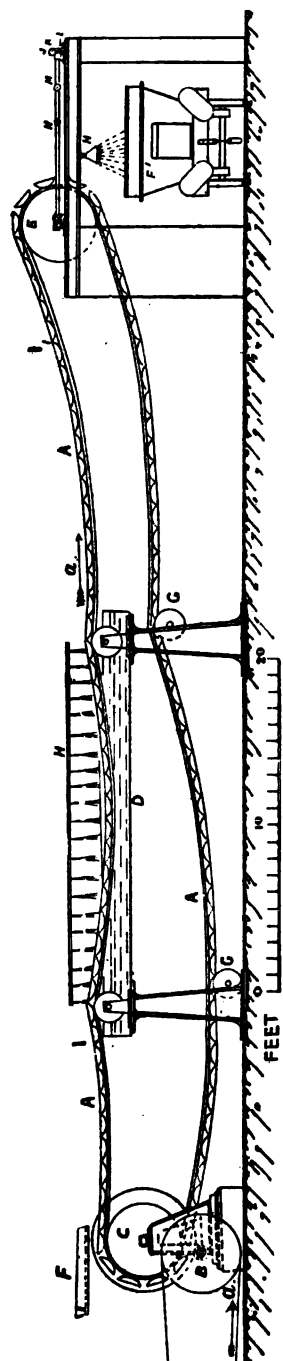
Longitudinal Elevation of Hawdon's Slag Casting Machine.
